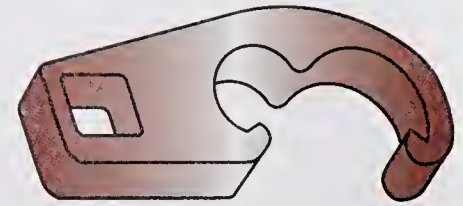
Tie-rod sleeve adjusting tool.
